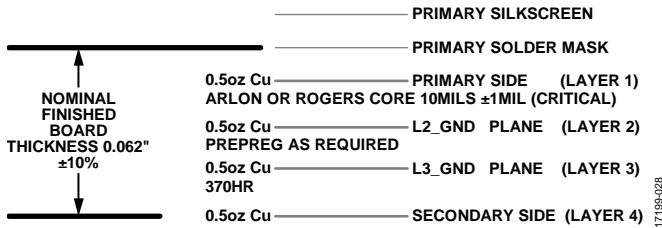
The Cross Sectional View of the ADMV8420-EVALZ PCB Layers
